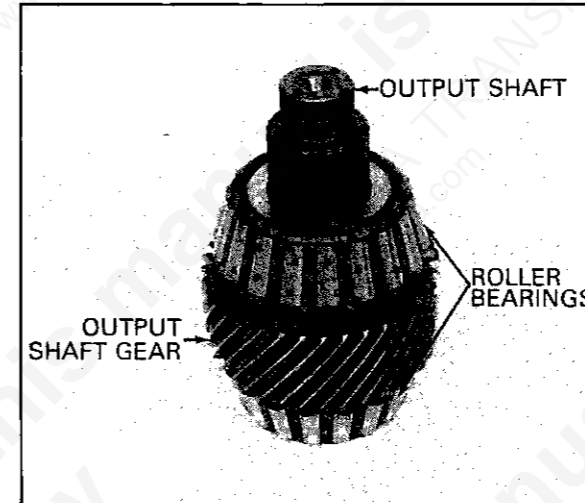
OUTPUT SHAFT BEARINGS INSTALLATION
